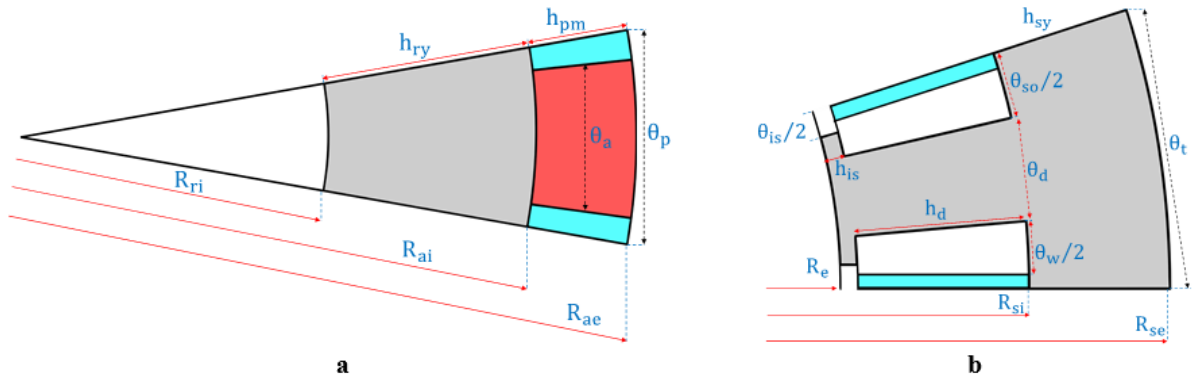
Geometry of surface-mounted internal rotor PMSM : (a) rotor and (b) stator
